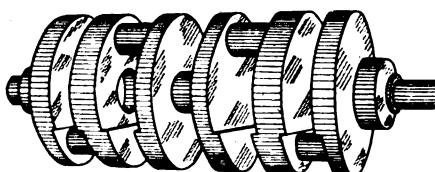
Diagram Showing Harroun Method of Crankshaft Balancing
